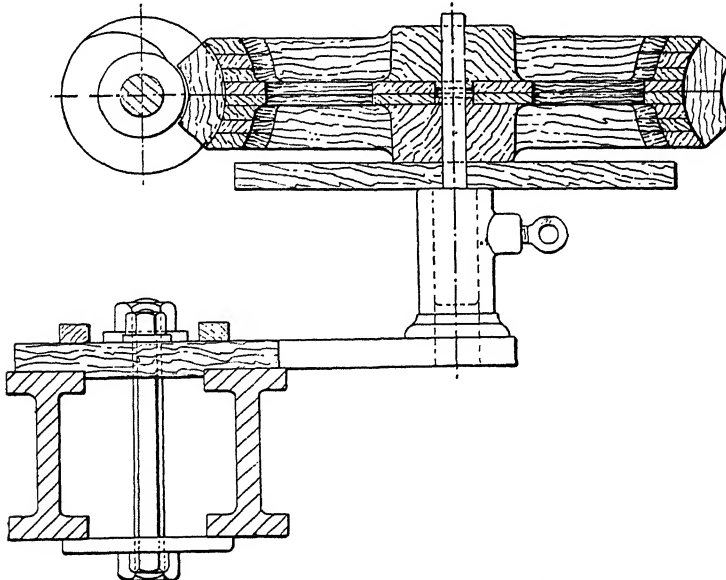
Worm-wheel Pattern mounted for Cutting the Teeth
